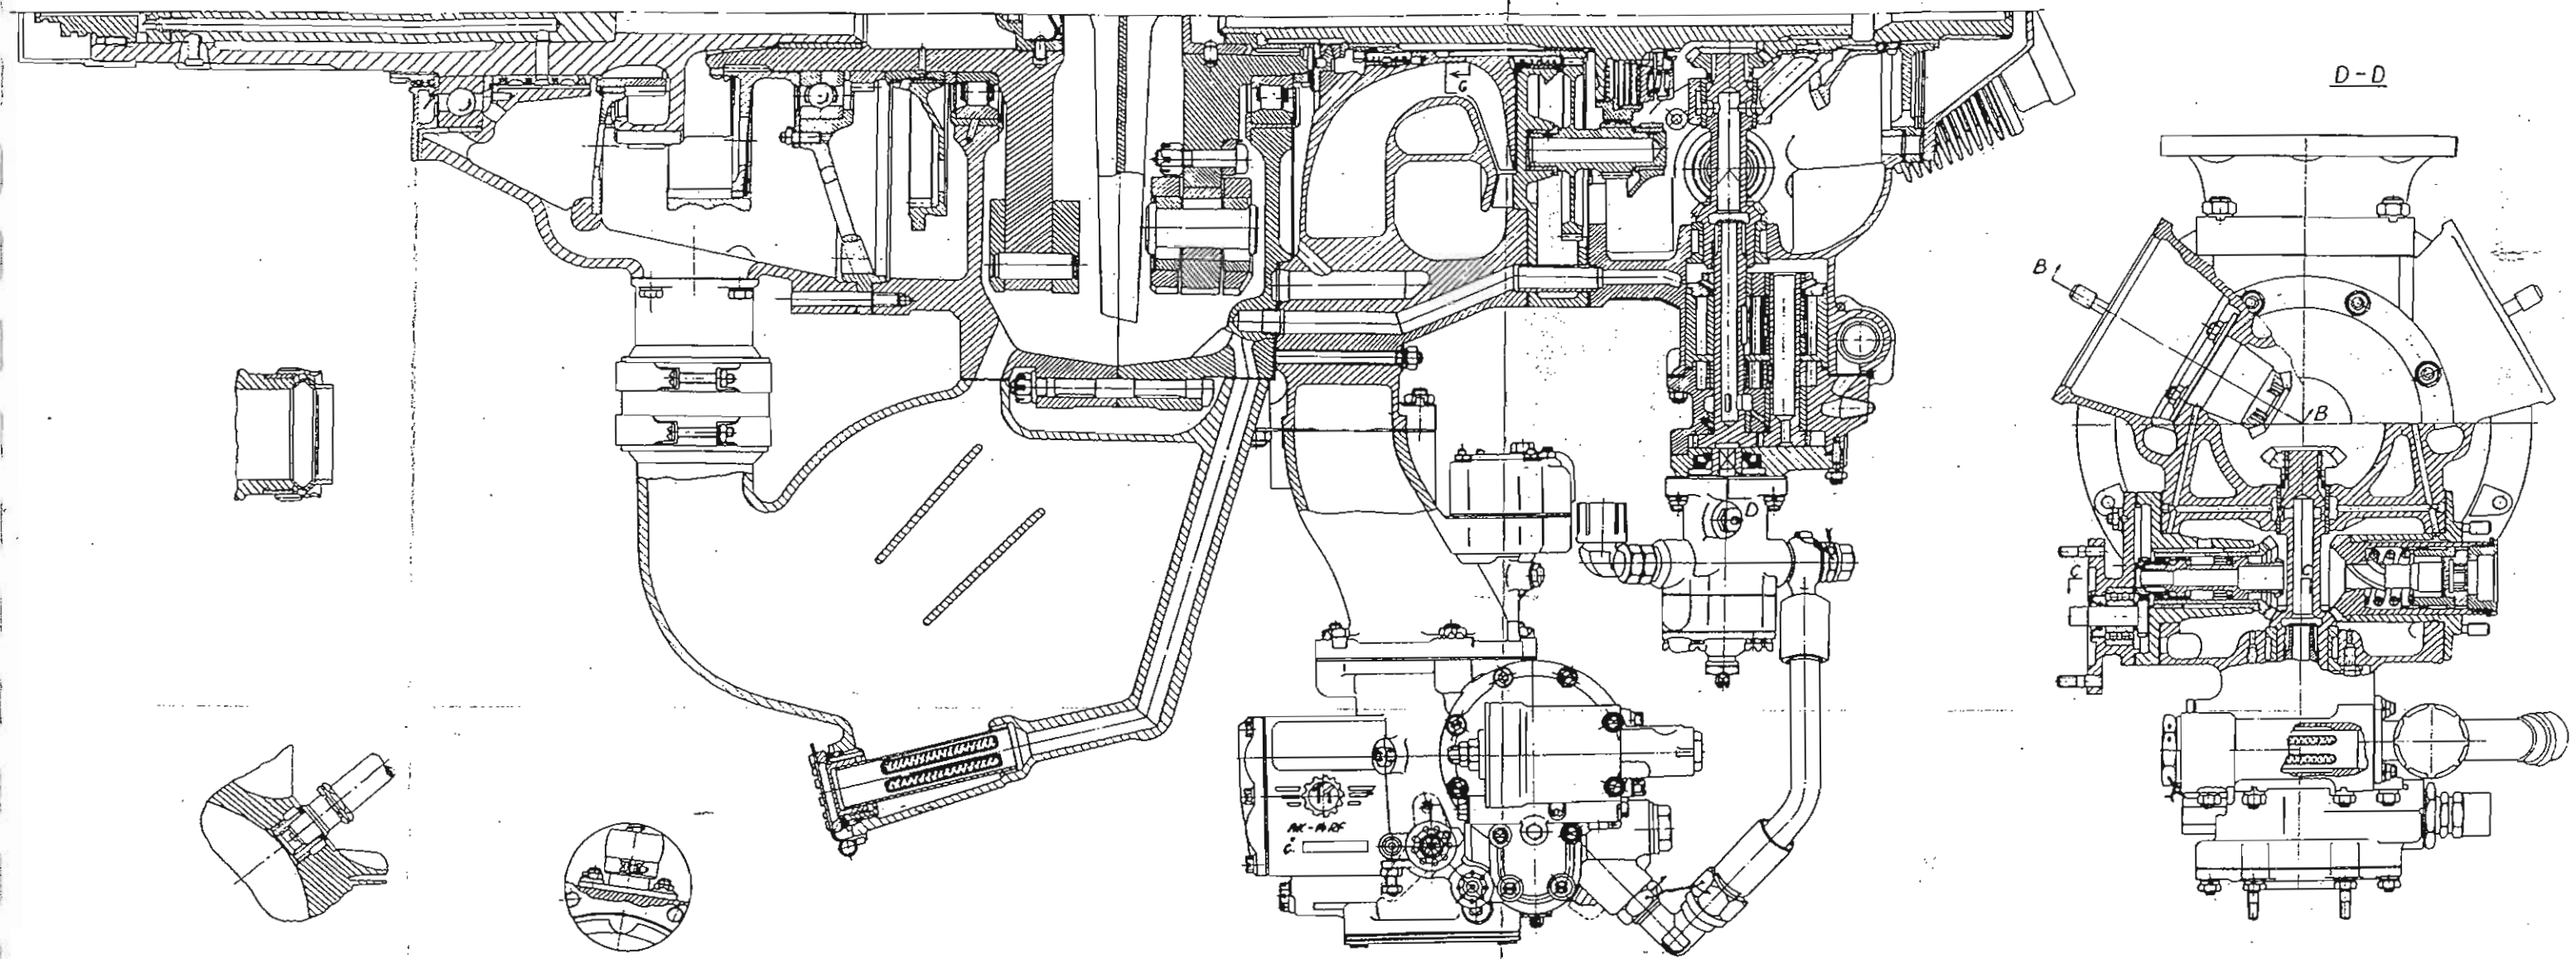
Longitudinal section of the M 462-RF aircraft engine (lower part)
